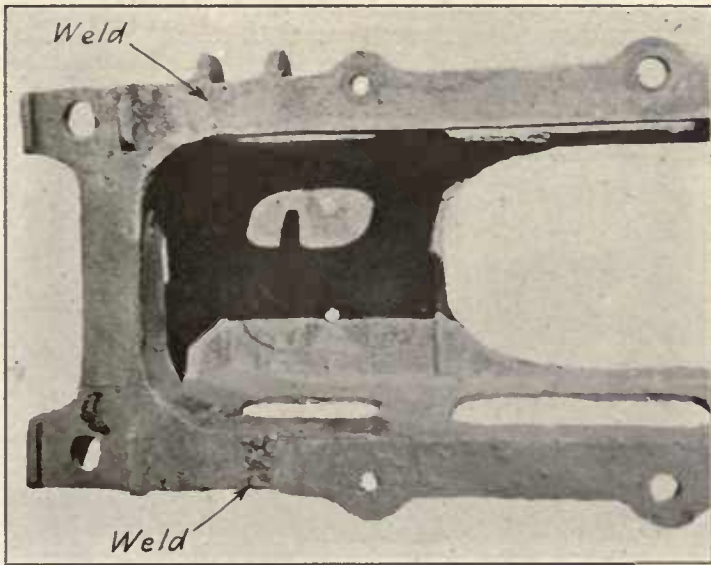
Cracks Welded in Car Truck Bolster.
